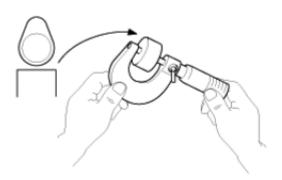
Measuring Thickness Of Tappet Using Micrometer Courtesy of HYUNDAI MOTOR CO.
